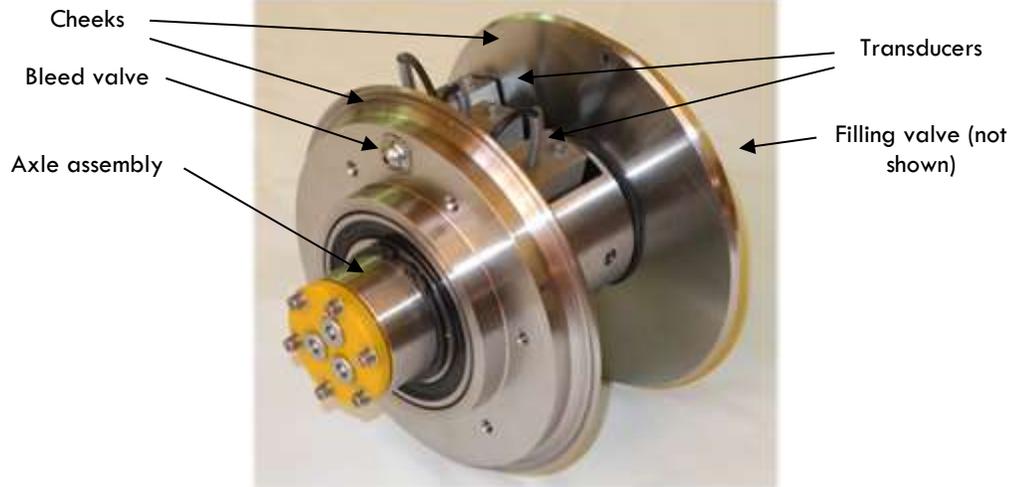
PARTS OF A WHEEL PROBE – 2
